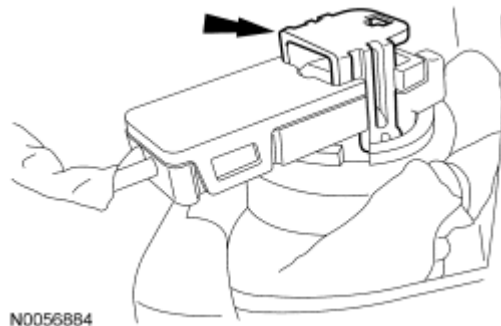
Identifying Side Air Bag Module Electrical Connector
